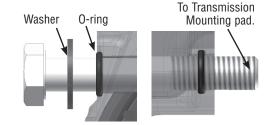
Capscrew, washer and o-ring inserted into PTO mounting pad.
